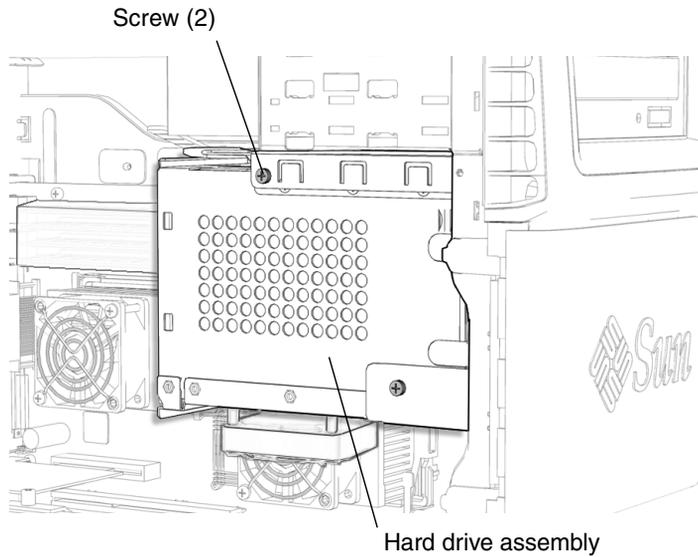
Removing the Two Screws for the Hard Drive Assembly
